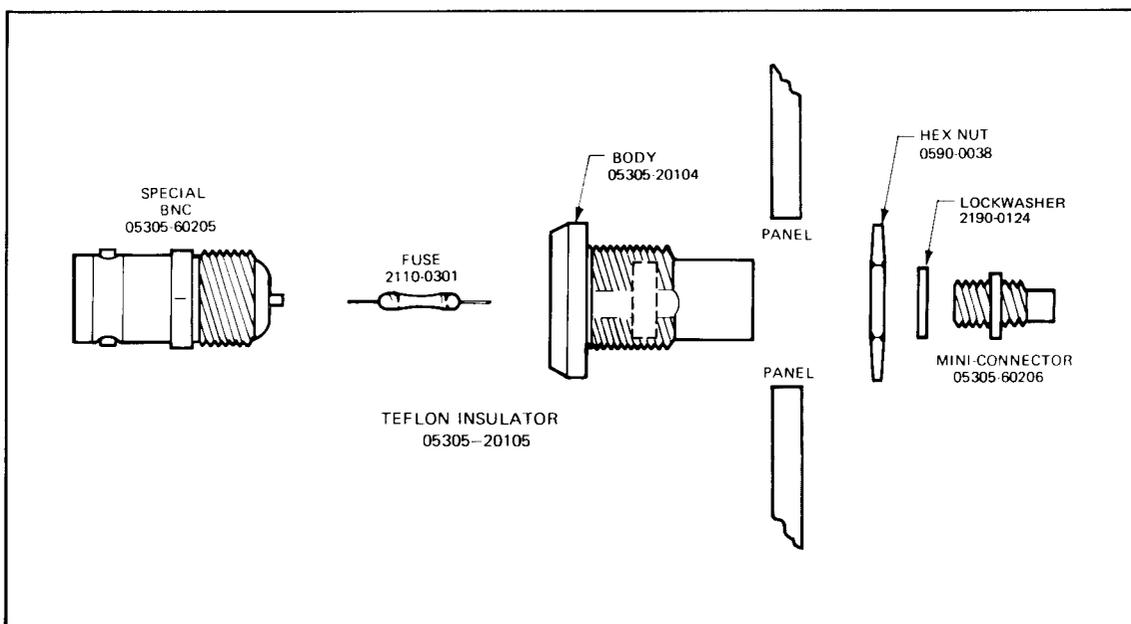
Details of Input Connector J1 and Fuse Mounting
